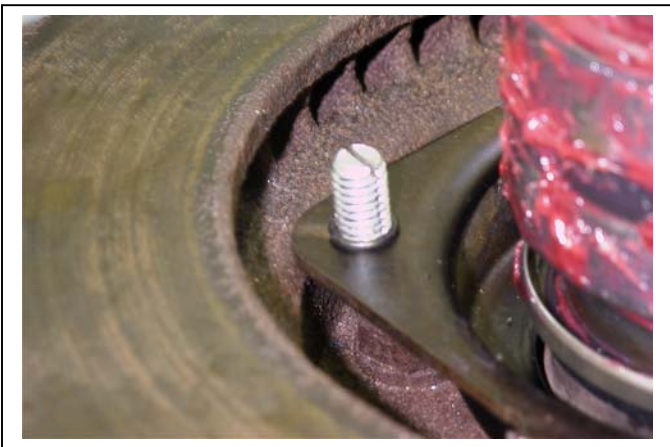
Illustrates slot cut across end of outer seal retainer plate bolts. Note “O” ring retaining bolt in seal retainer plate.
